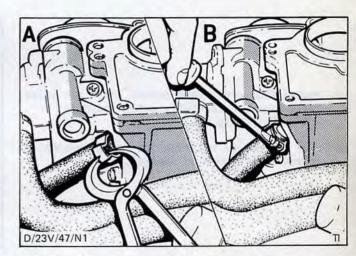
Disconnecting and reconnecting fuel supply pipe.
